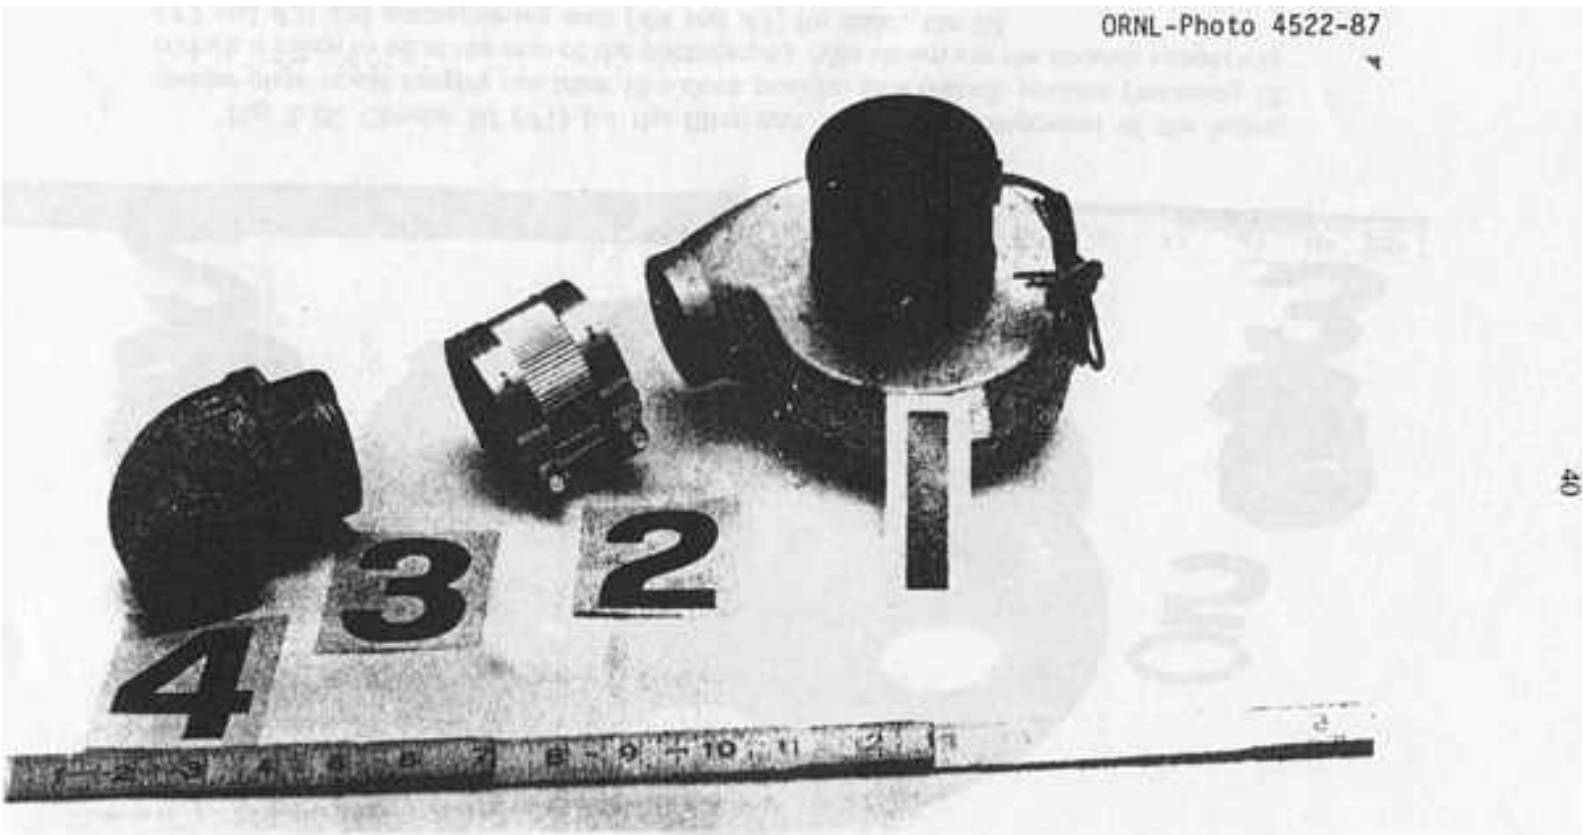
Blower (#1) with exhaust extension assembly. Note adapter coupling (#2), pipe nipple (#3), and elbow (#4) for vertical exhaust pipe.
